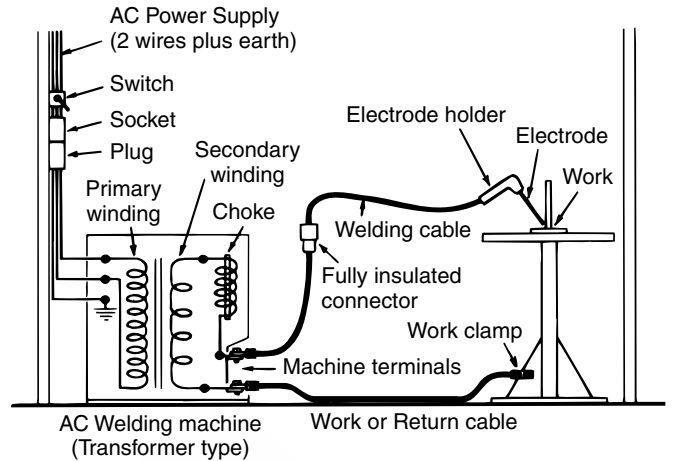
Typical Electrical Connections for Arc Welding Machines
